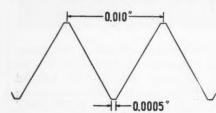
Enlarged Outline of the Ground Thread Form of a 100-Pitch Thread Gage
